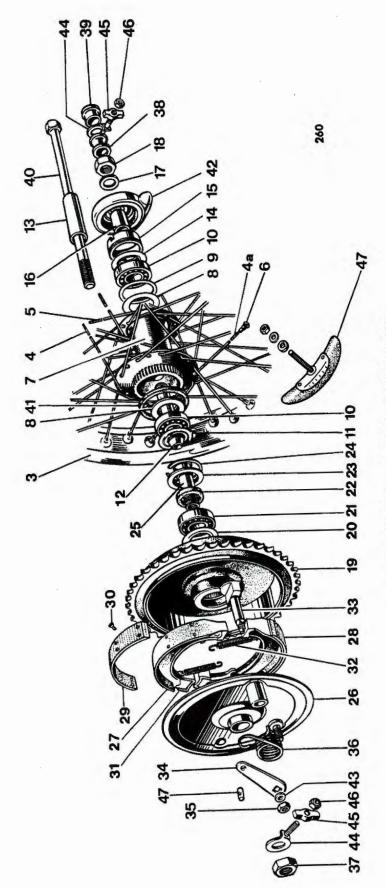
QUICKLY DETACHABLE REAR WHEEL
